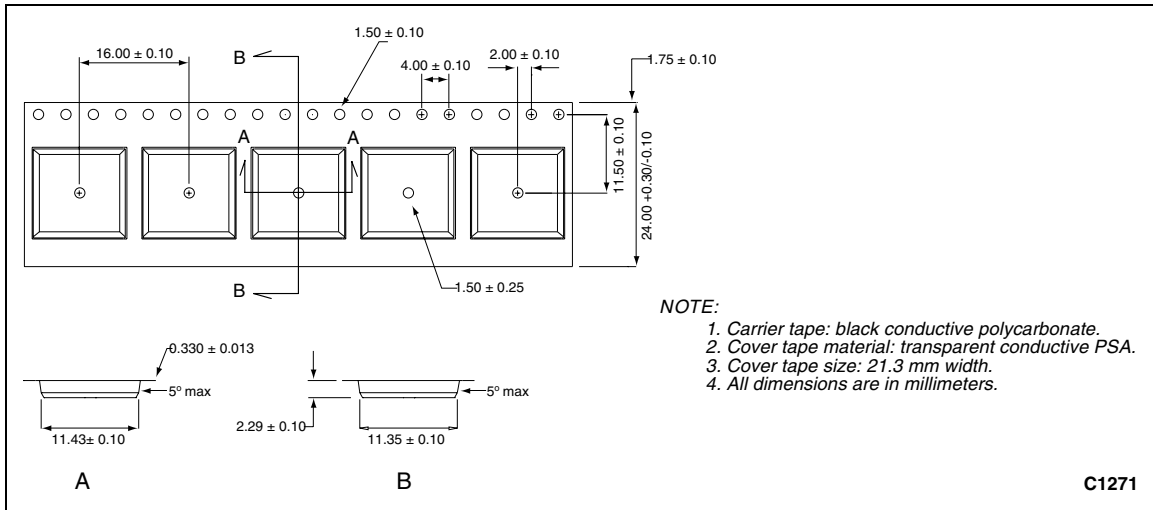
CX42054 24-Pin PQFP Tape and Reel Dimensions
